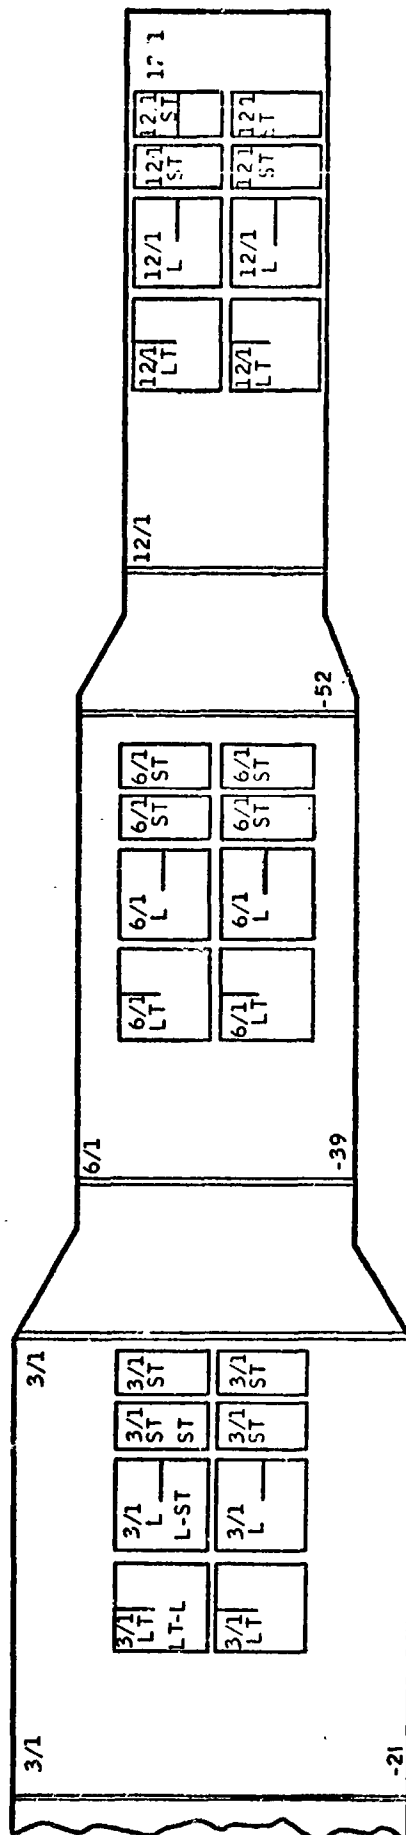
Specimen Orientation (Tension) For AA7039-T63 and AA6061-T6 Hand-Step Forgings
